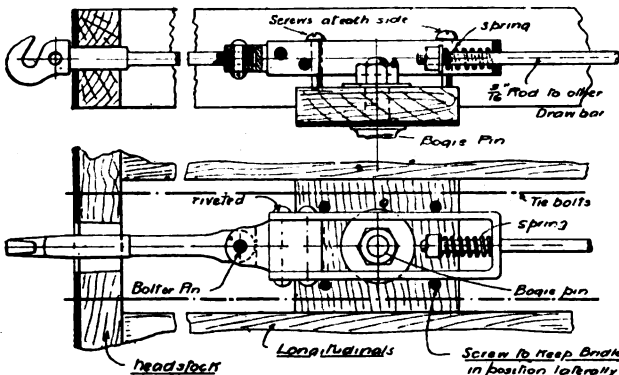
SPRING DRAW BAR GEAR (CONTINUOUS).
